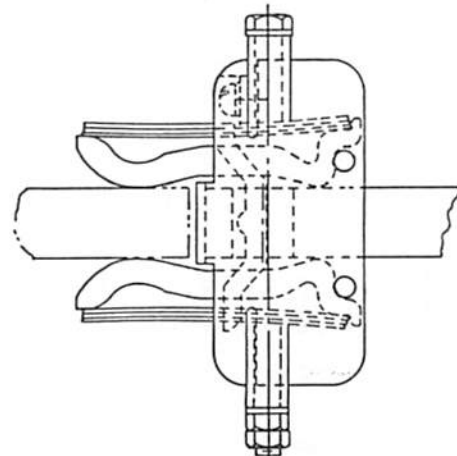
B. Primary disconnect assembly (for AKT-50), Ref. No. 220A.
